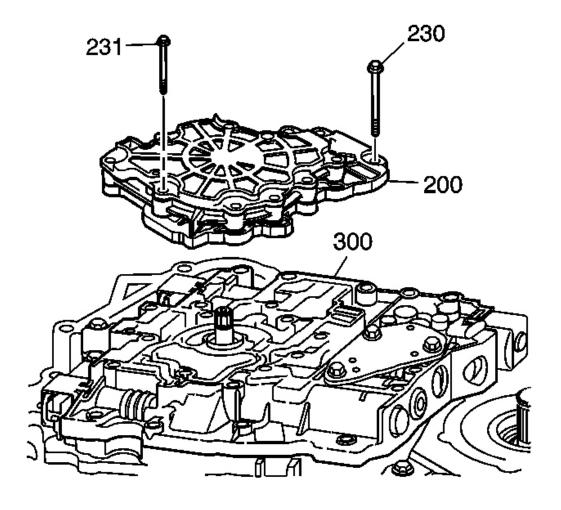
Locating Oil Pump Assembly Courtesy of GENERAL MOTORS CORP.
